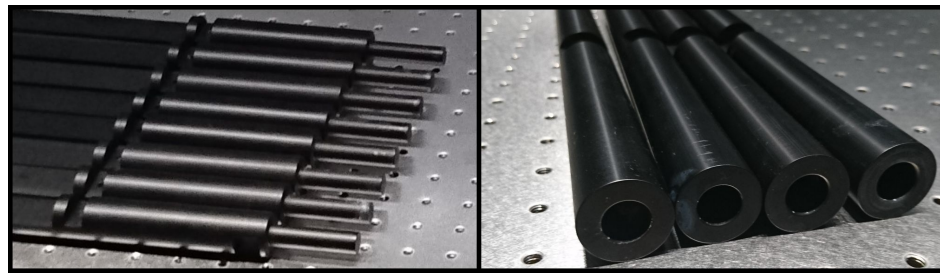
Pole and pockets pairings of the mounting structure, the end of each set of uprights features one of these features allowing for easy modification of the system modules.
